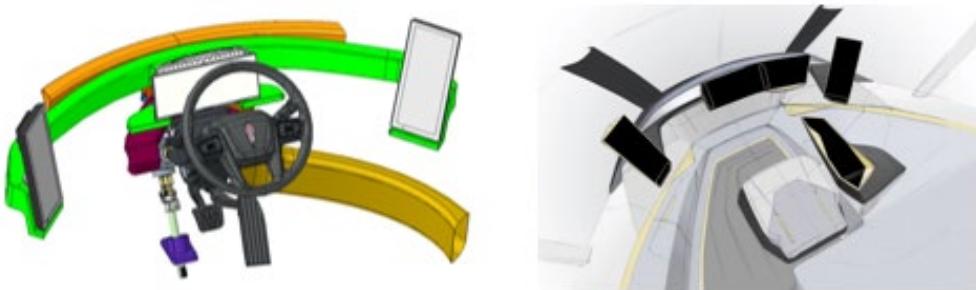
Engineering layout & analysis (left), and final driver package theme (right)
